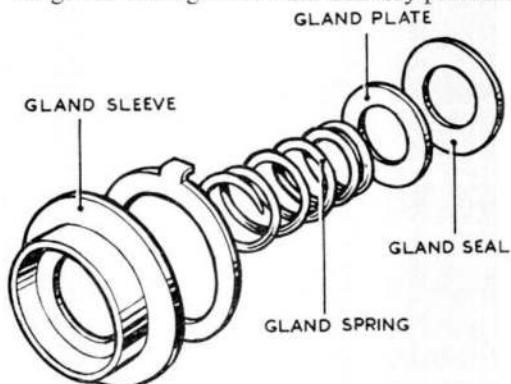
Exploded view of gland seal (Marks 1 to 9, 32 and 33)
